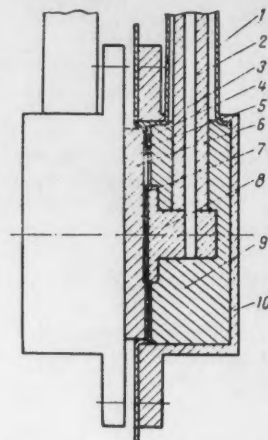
Assembly for measuring the resistance of insulators under irradiation. 1) BPTE cable screen; 2) BPTE cable insulation; 3) copper conductor of BPTE cable; 4) brass guard ring; 5) aquadag guard ring; 6) specimen to be tested; 7) aquadag or sputtered silver; 8) brass electrode; 9) teflon washer; 10) case of assembly.
